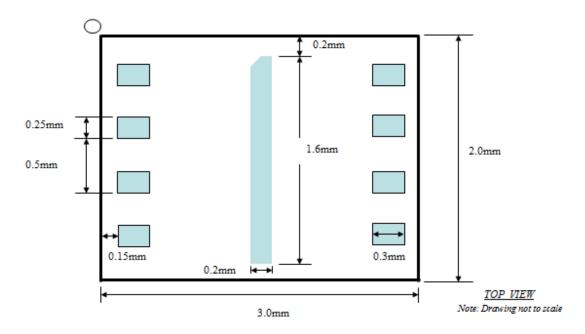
PCB Pad Layout for 2x3mm 8-USON
